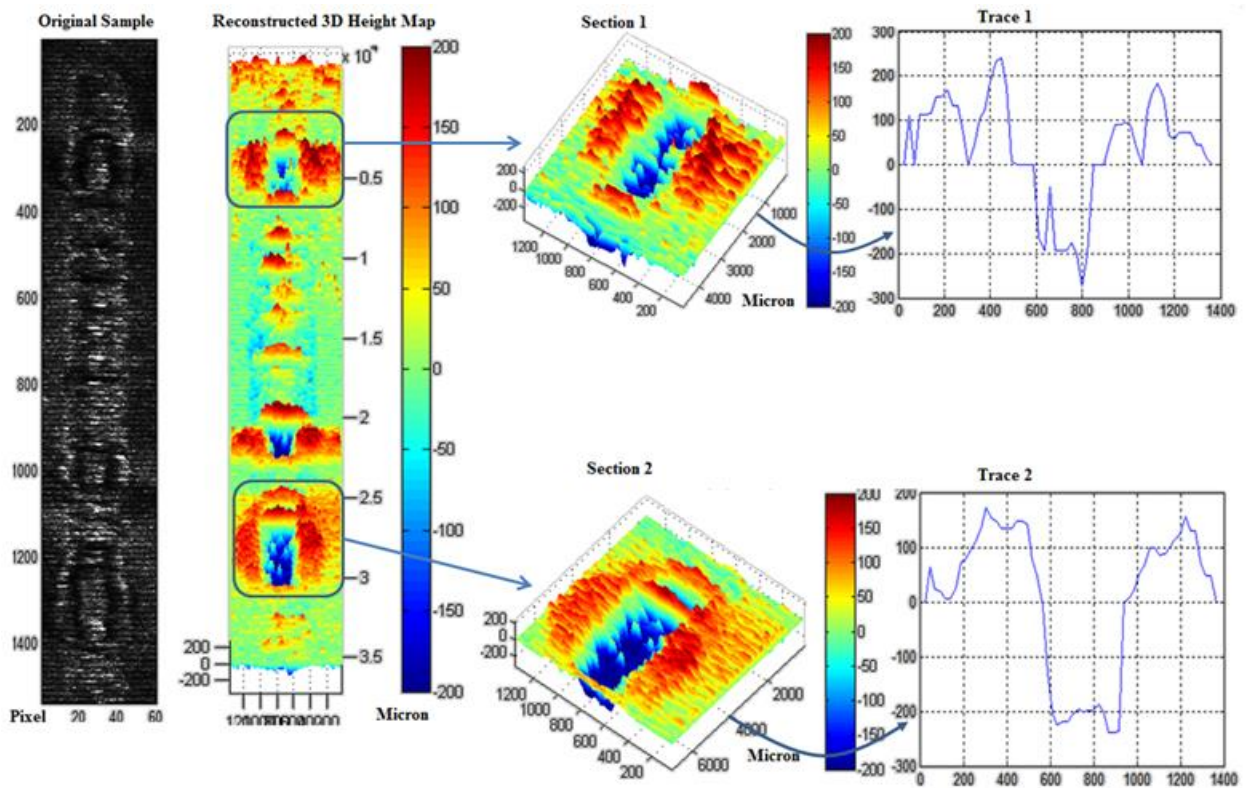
Reconstructed height map of a laser weld sample
